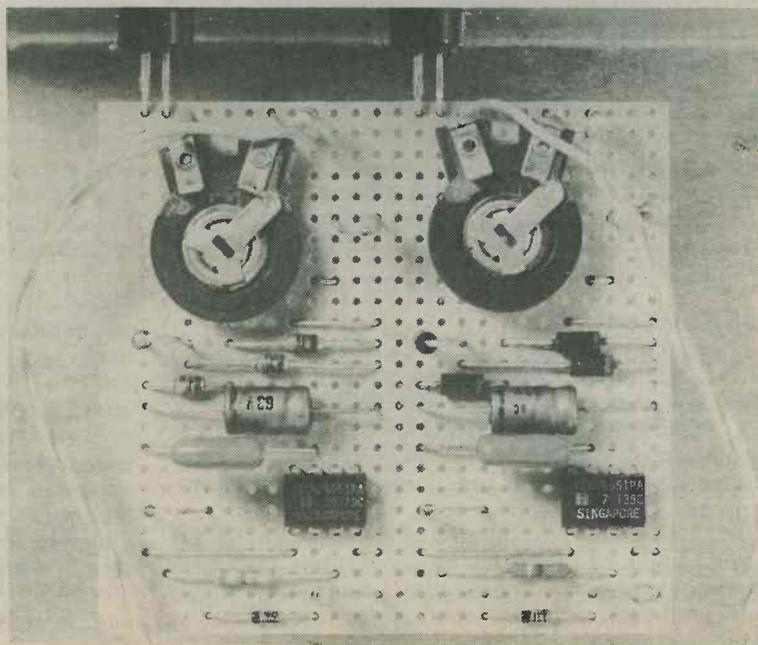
The components for the two channels are assembled on a Veroboard panel with the layout shown here.
